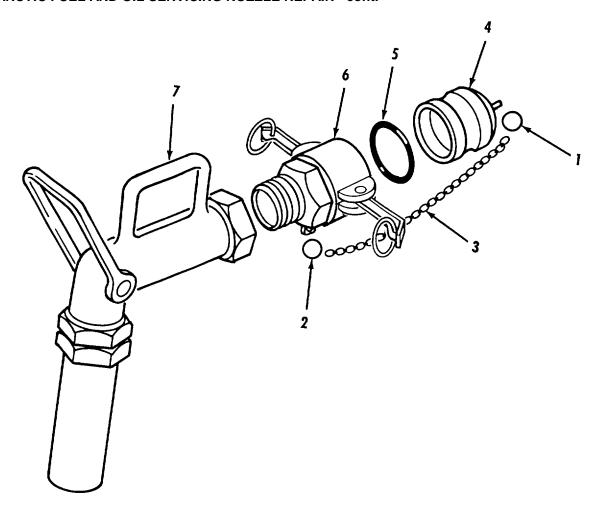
Arctic Fuel and Oil Servicing Nozzle Disassembly.
